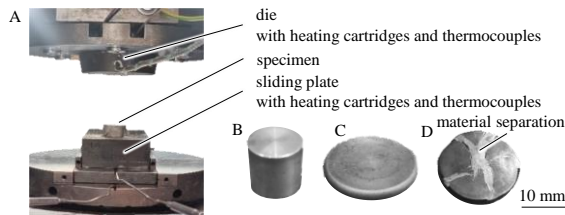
The test setup for forging-like cylinder compression tests (A), cylinder specimen (B), forged specimen (C), and separation by shear bands (D).
